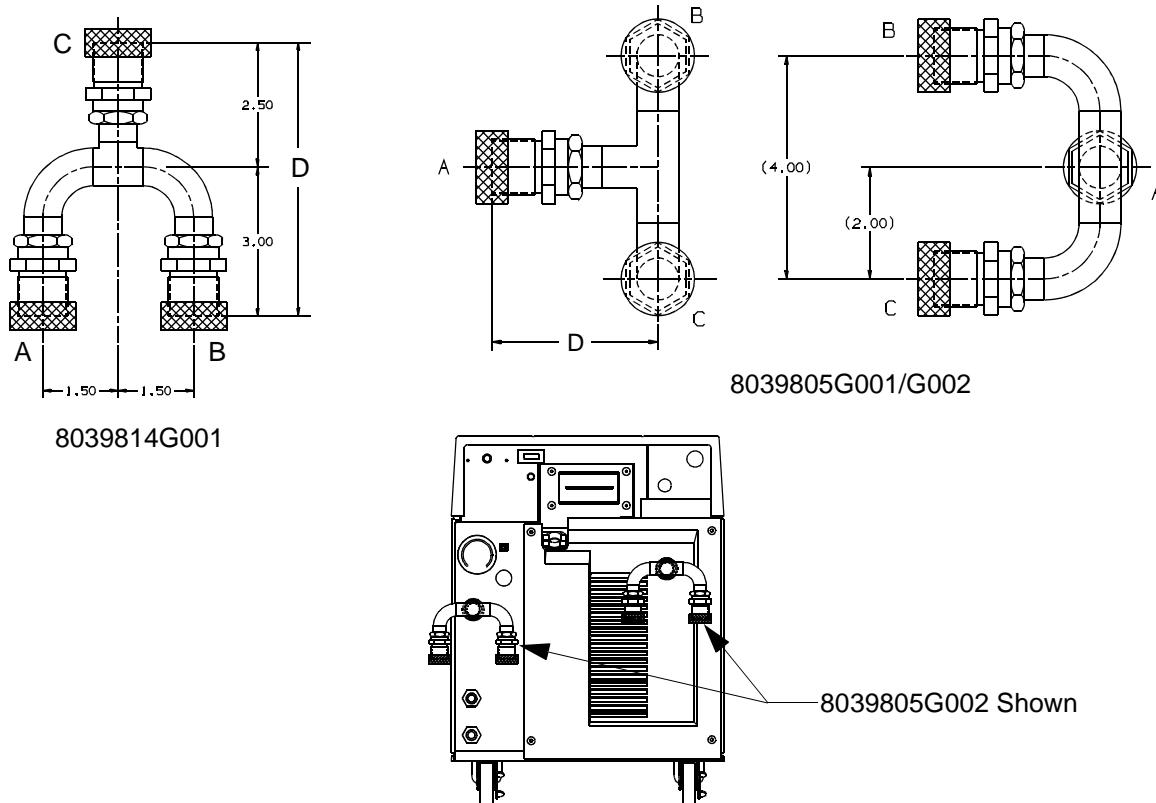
Typical Installation of Helium Y-Tube Assemblies
